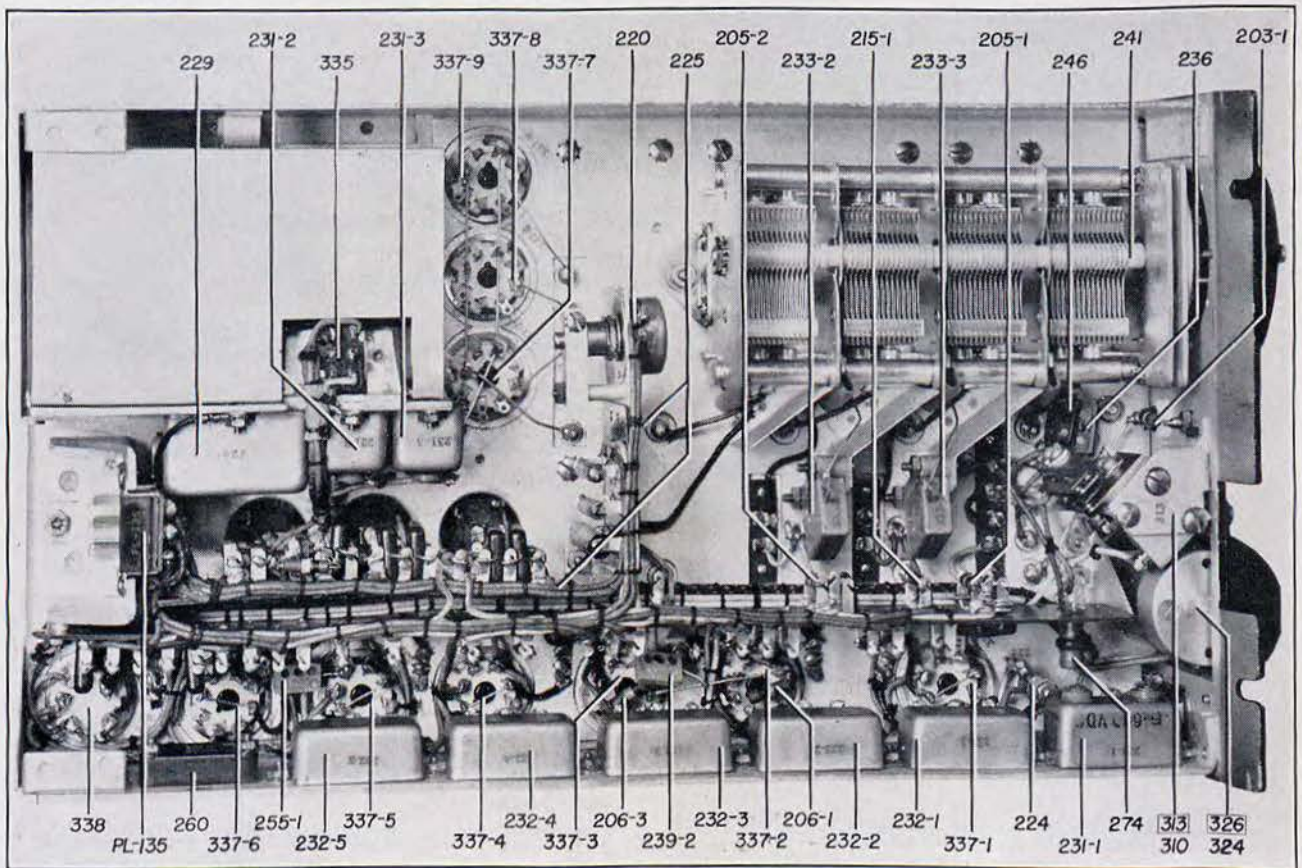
RADIO RECEIVER BC-225-A OR BC-352-A, BOTTOM VIEW OF CHASSIS
